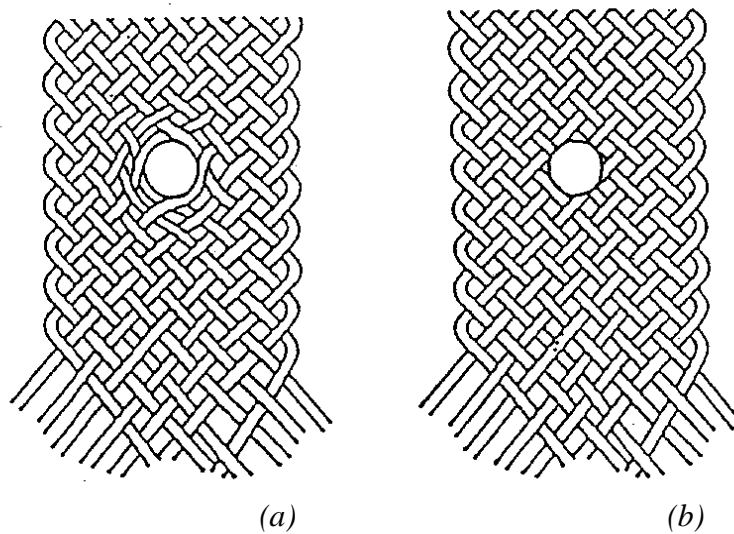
Schematics of (a) braided hole (BH) and (b) machined hole (MH) specimens
